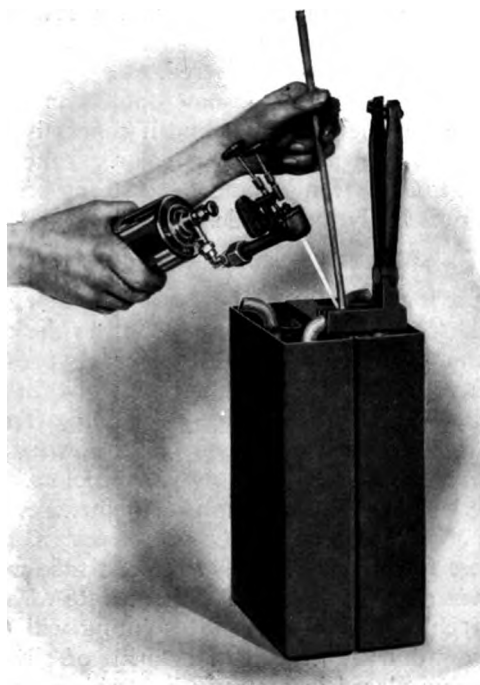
WESTINGHOUSE ALCOHOL TORCH
